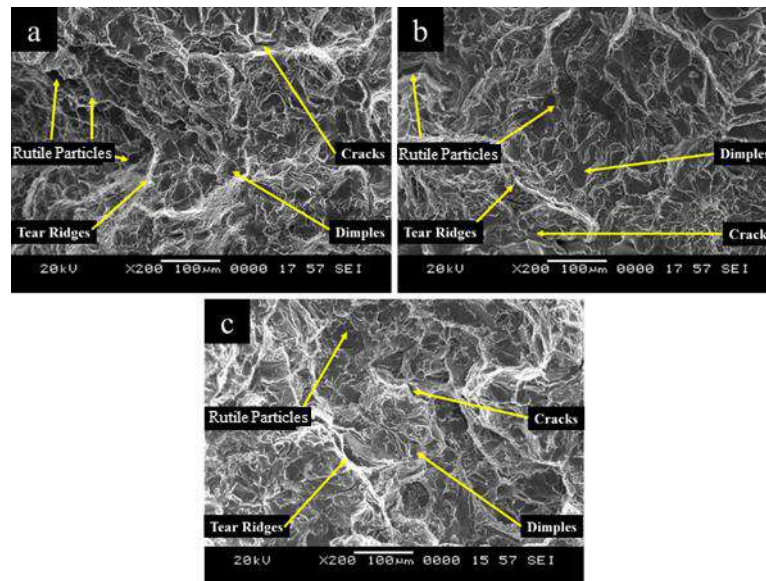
SEM images of the fractured area of AA6061-3% Rutile composite joints friction stir welded at a rotational speed of 1000 rpm and welding speed of 75 mm/min using: a) Threaded profile pin, b) Combination of Square and Threaded Cylindrical Profile pin and c) Square profile pin
